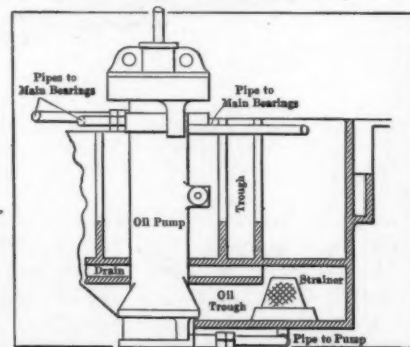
Sectional side view of the Autocrat Oldsmobile, showing the troughs, strainer and the gear-driven oil pump
